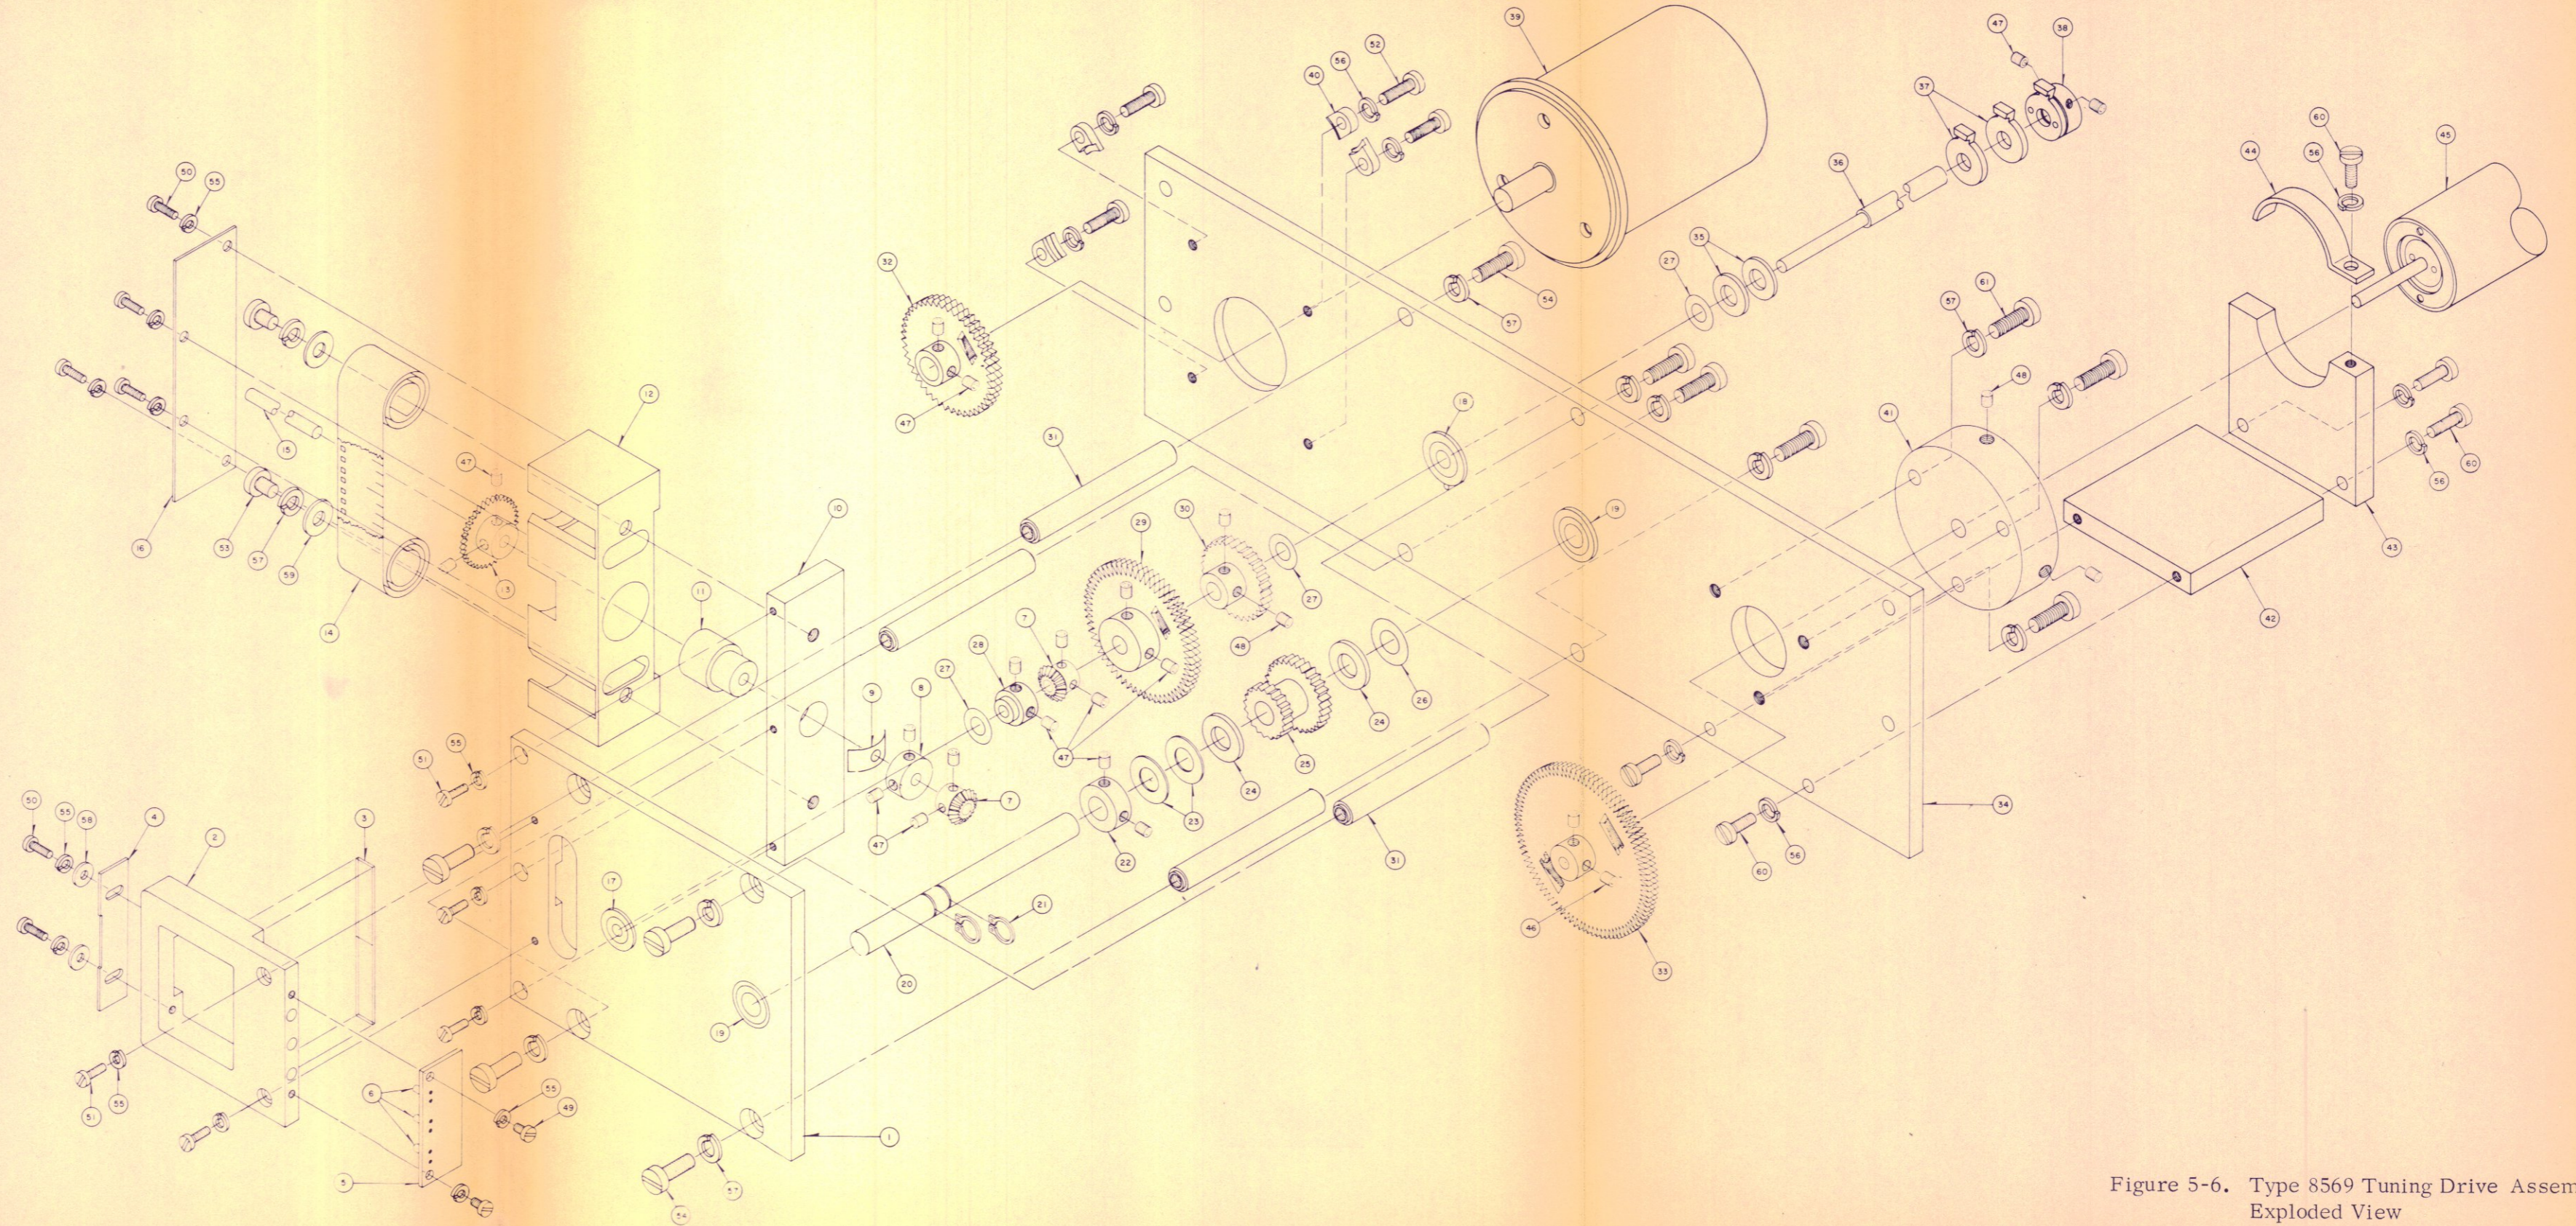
Type 8569 Tuning Drive Assembly, Exploded View
